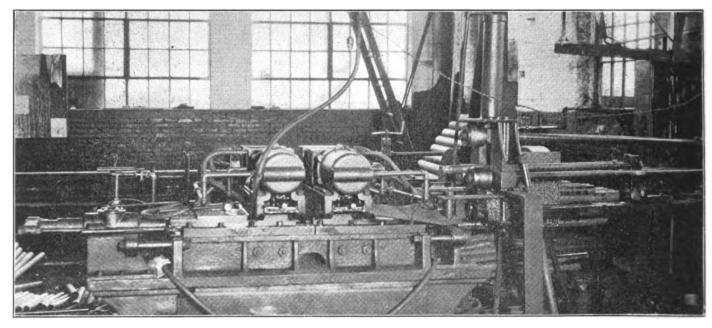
This Machine May Be Used for Reclaiming Pipe as Well as for Welding Flues
